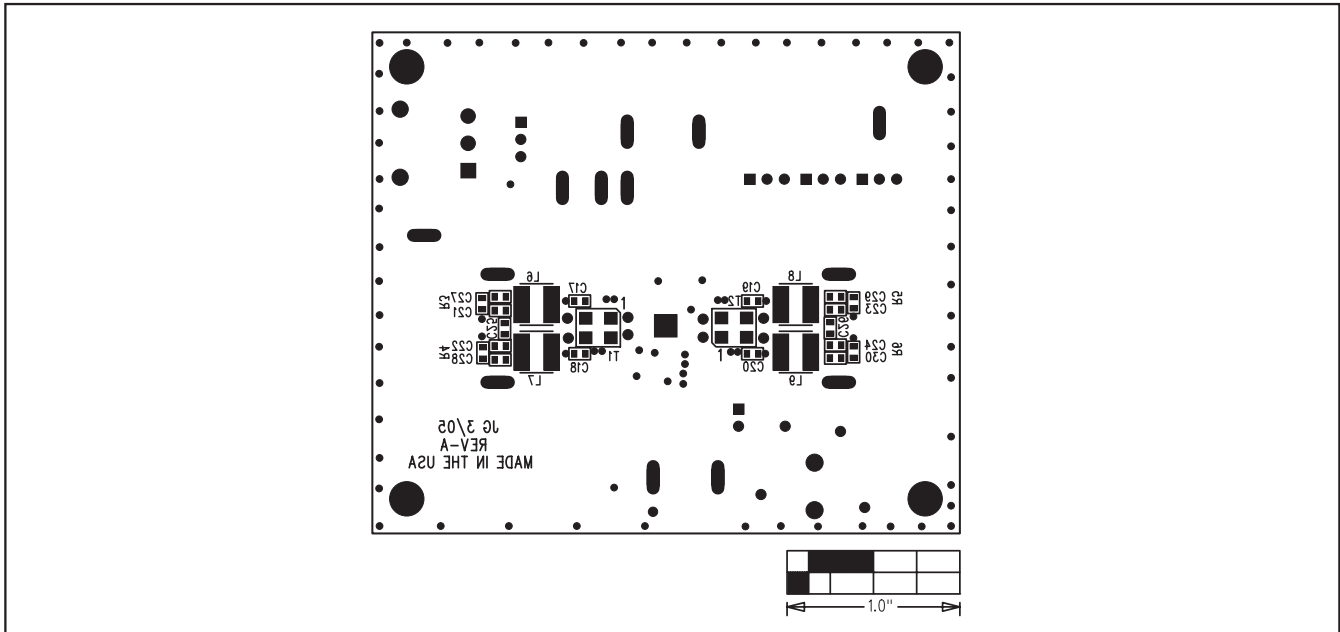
MAX9752A EV Kit Component Placement Guide—Solder Side
